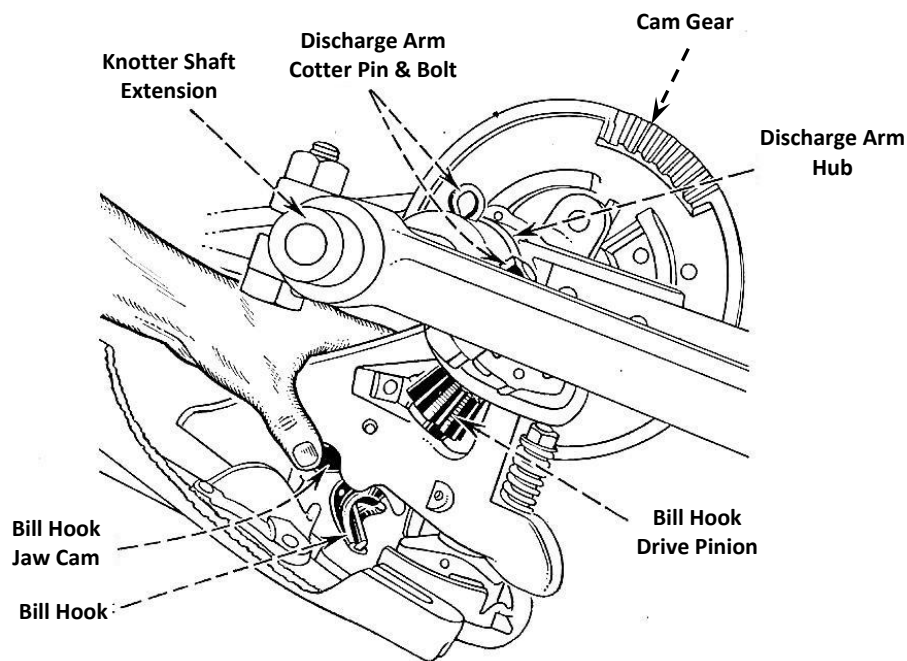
McCormick binder knotter – Adjustment of Cam Gear end-float
